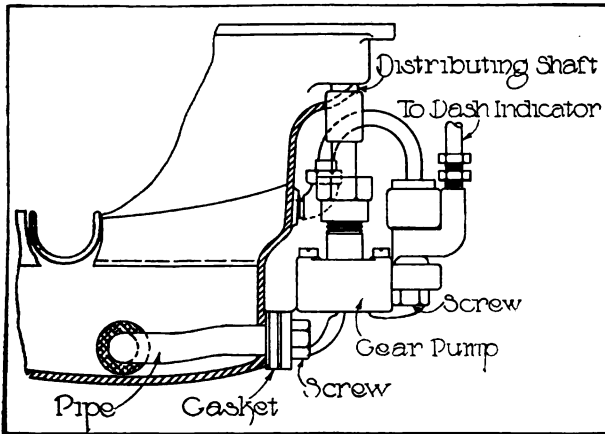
Showing the Location of Premier Oil Pump and Parts Displaced to Clean the Filter.
